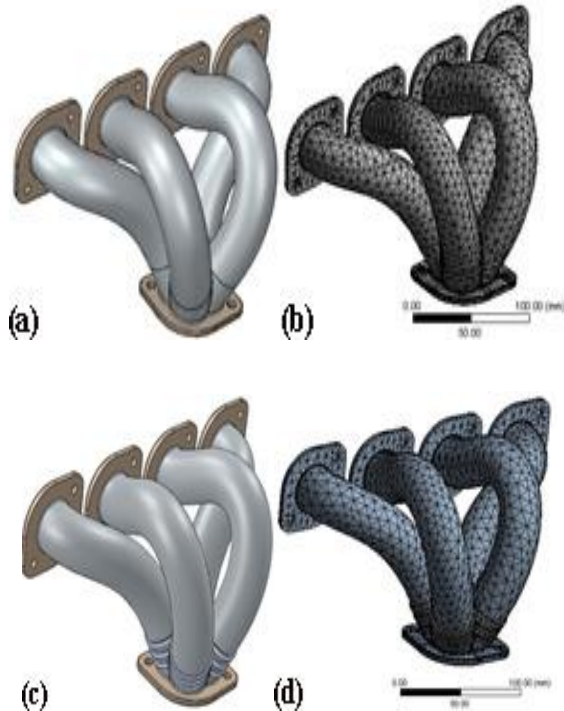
(a): The exhaust manifold generated by SolidWorks, (b): Finite element model of the original exhaust manifold, (c): Modified exhaust manifold with fins attachment, (d): Finite element model of the modified exhaust manifold
